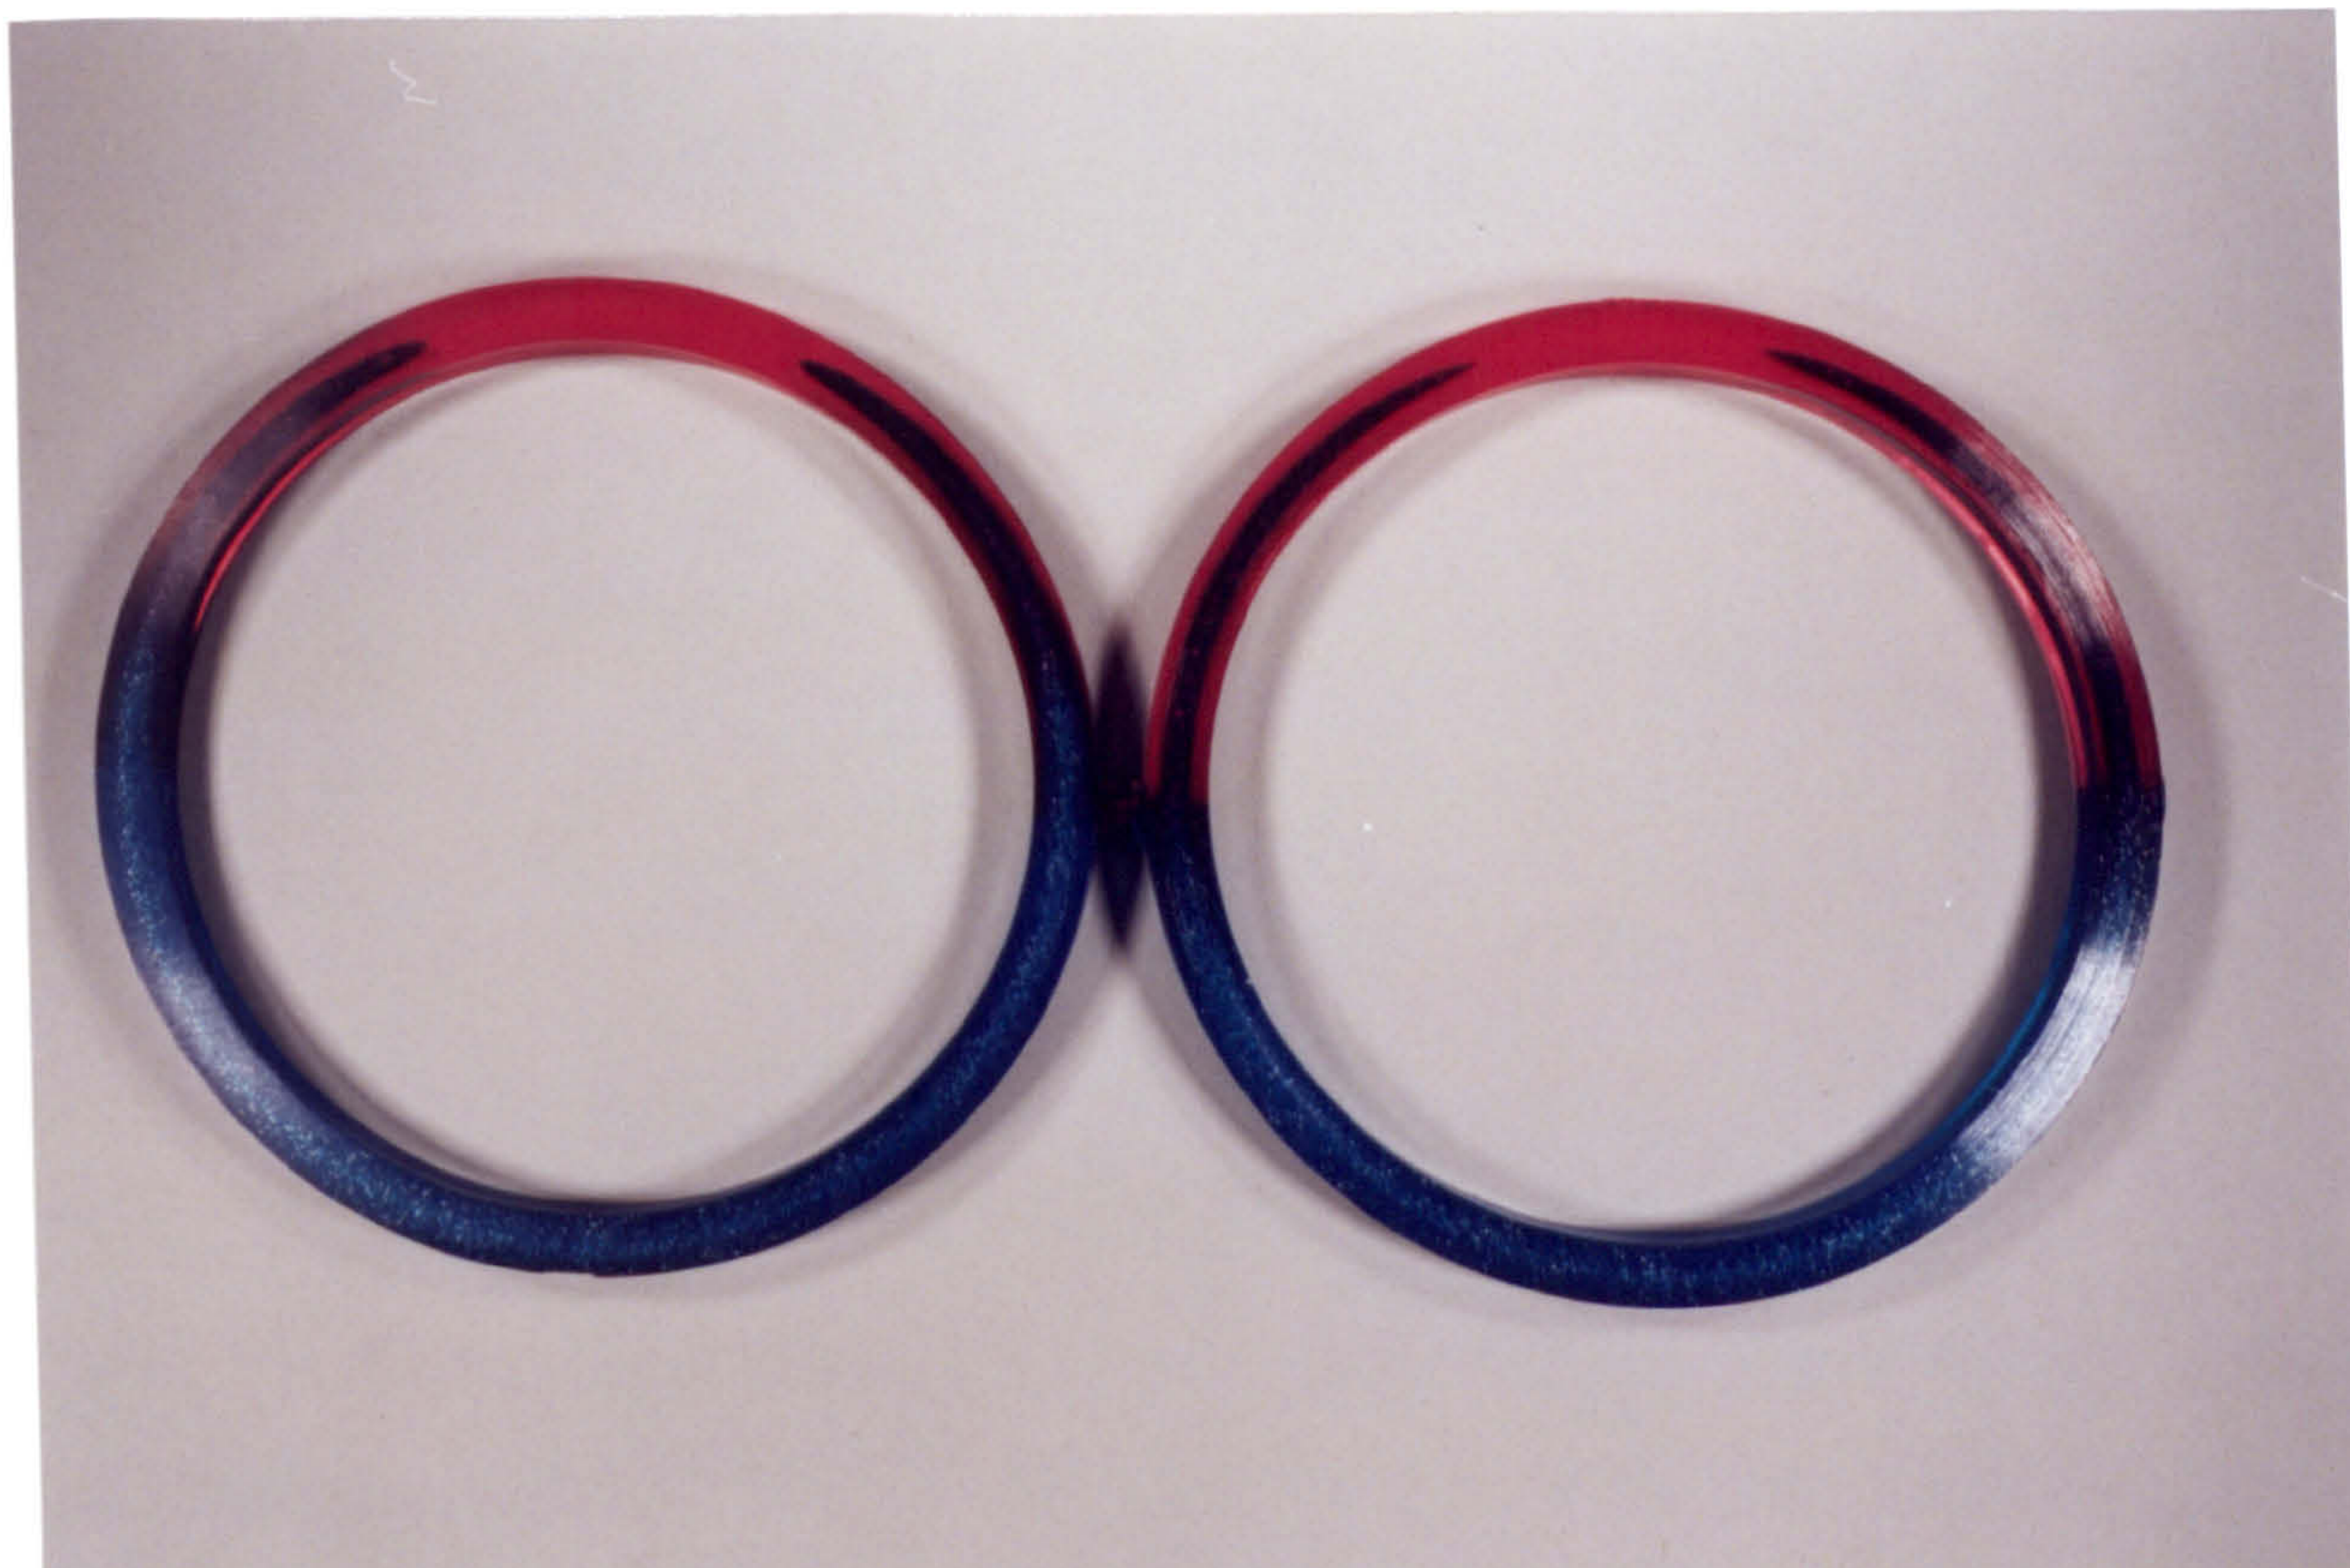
Ring mouldings produced with the colour process and the informed application of SCORIM shears.
